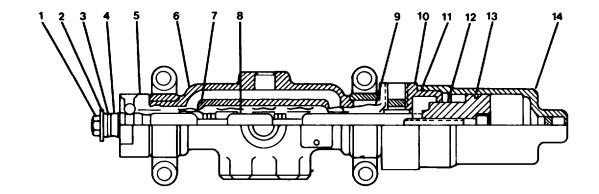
Linear Directional Control Valve Disassembly.
